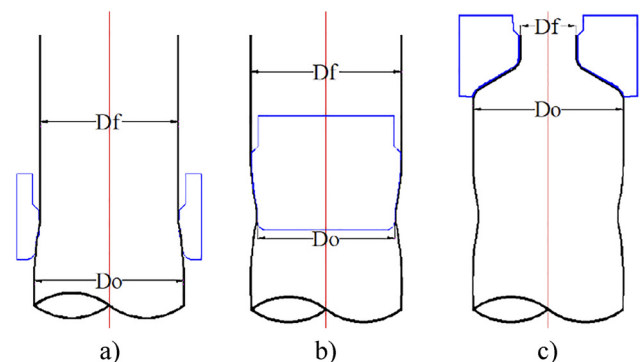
Geometrical set up: a) narrowing; b) expansion; c) necking
